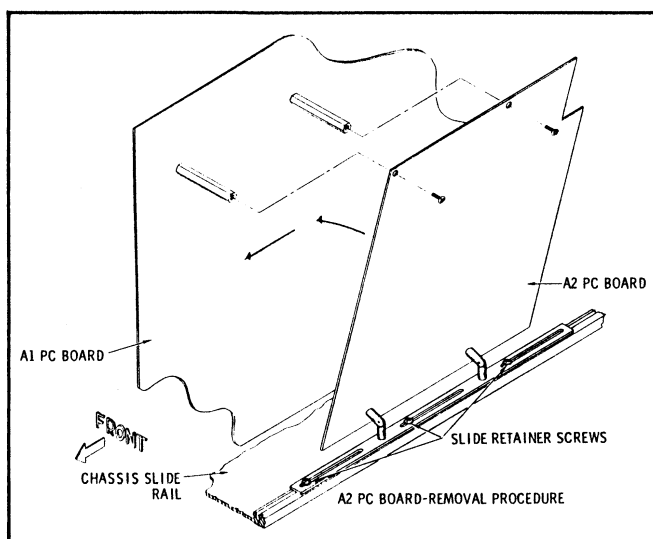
A2 Board (Series 70 Models) — Disassembly Diagram
